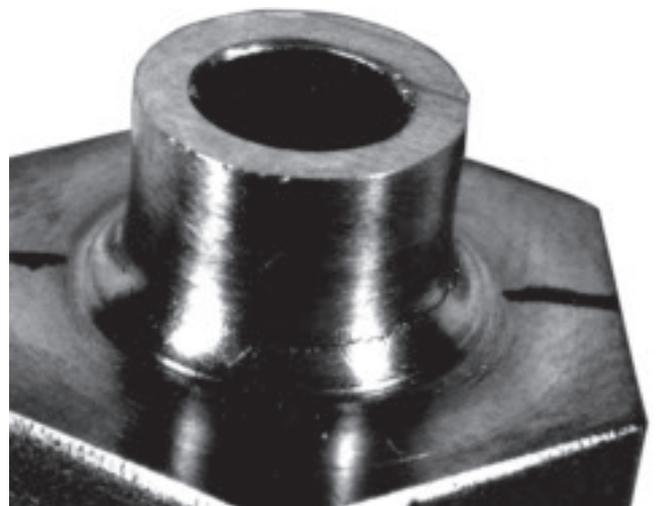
Centerline hot crack in 304L weld.
